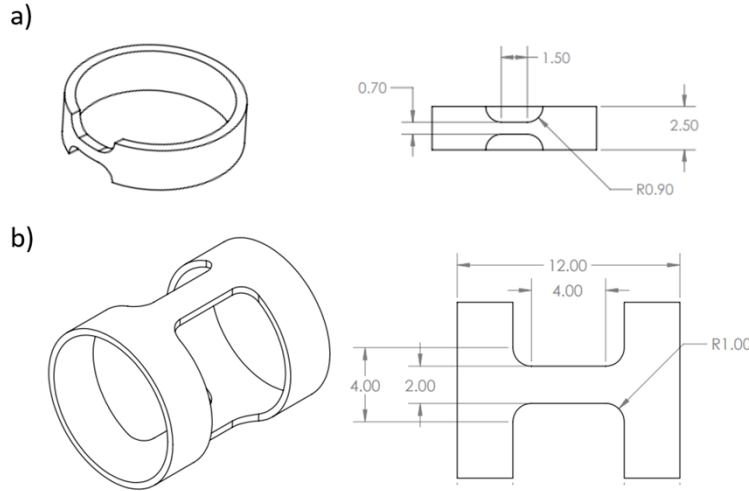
Drawings of (a) RTT and (b) ATT specimens used in this work. All dimensions are in millimeters.
